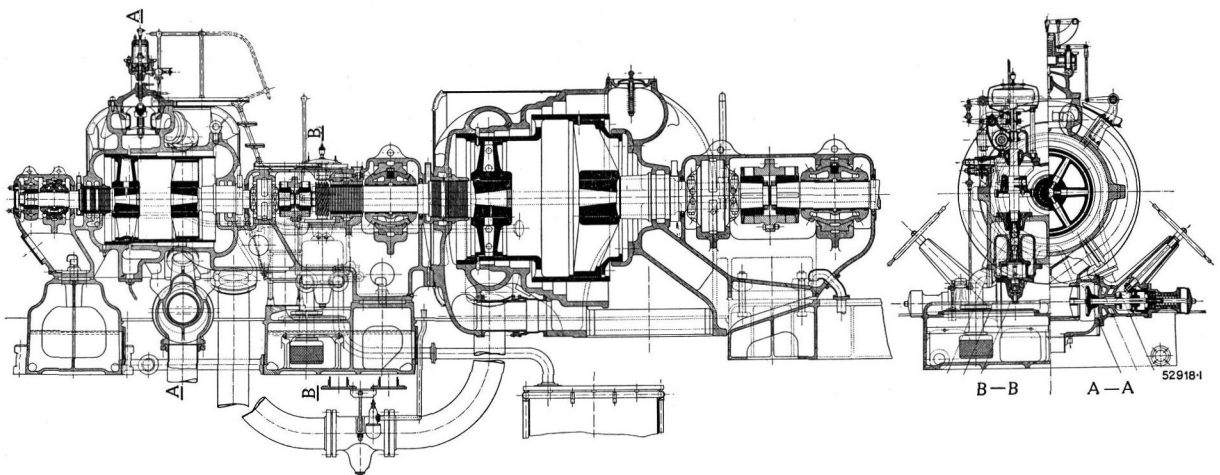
Longitudinal and cross section of the governing system and inlet valve parts of the two-cylinder turbine for Buenos Ayres, 7500 kW, 750 r. p. m., as an example of turbine design at that period. Built in 1907.
